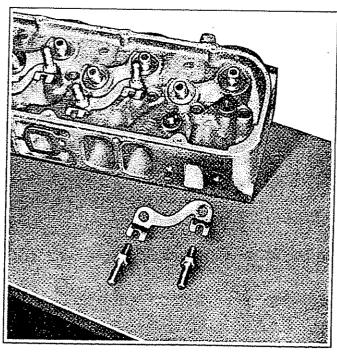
A2-31-Rocker Arm Stud & Push Rod Guide
